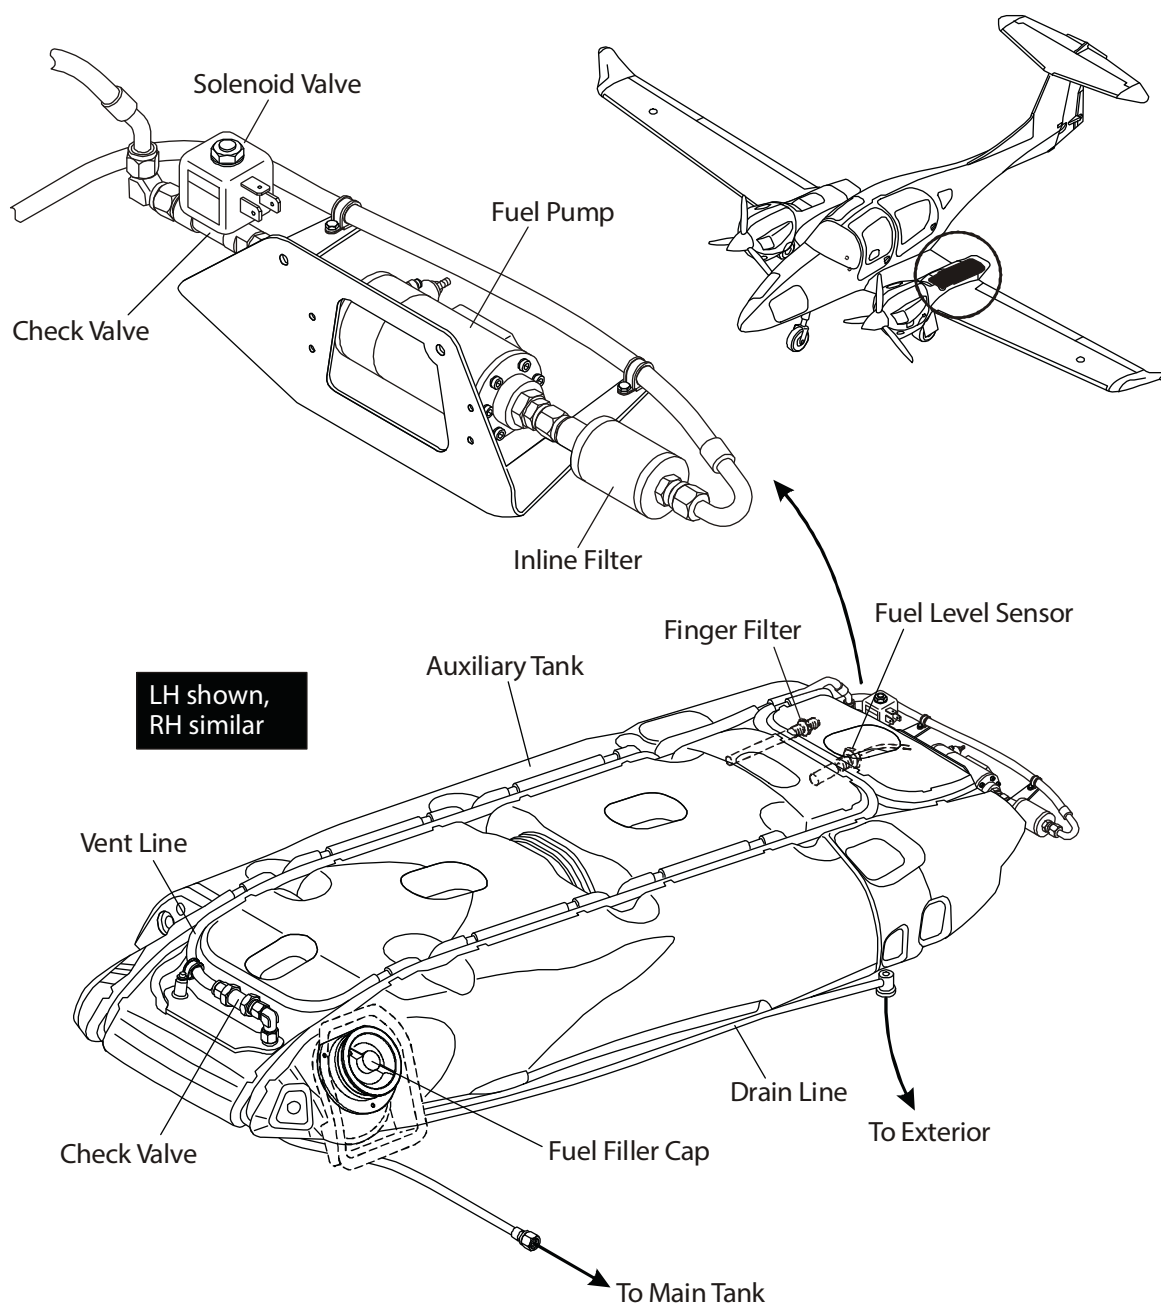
Auxiliary Fuel Supply to the Main Fuel Tank
